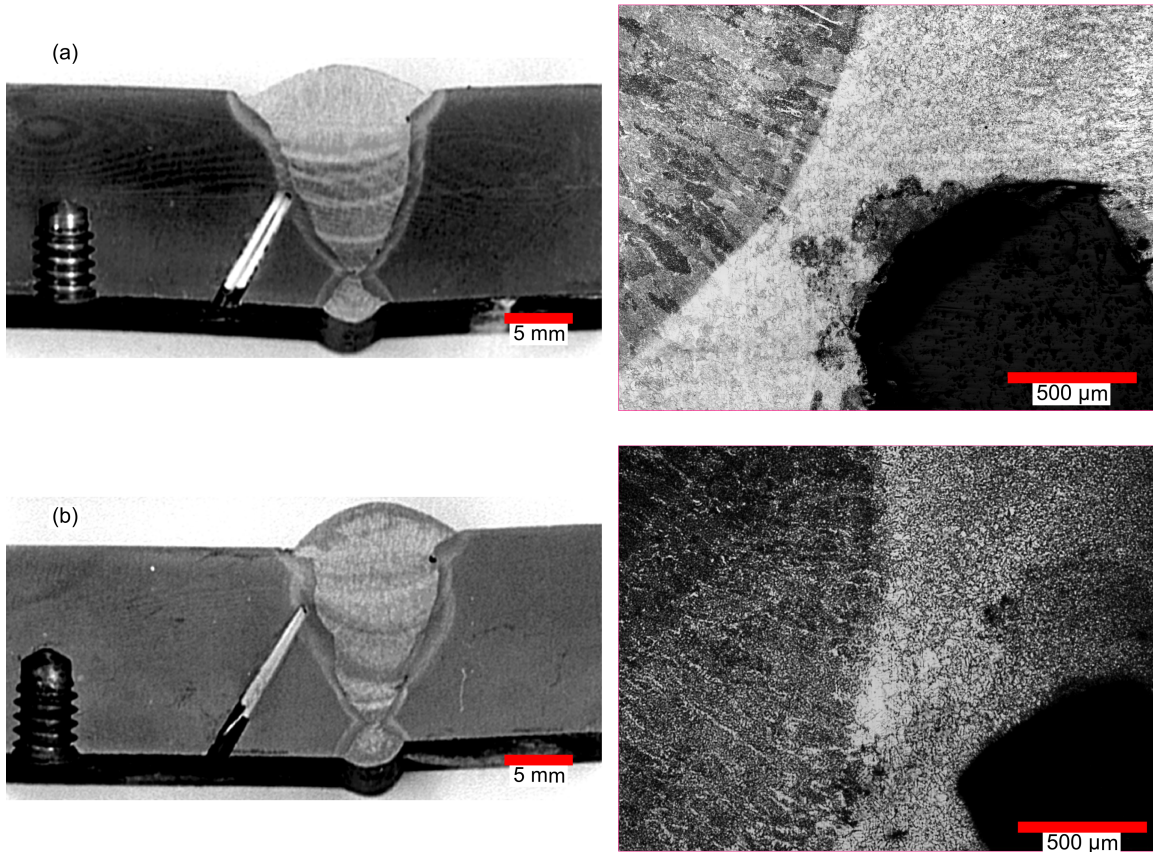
(a) Single torch weld macro picture and micrograph, (b) 2.75" dual torch weld macro picture and micrograph.
